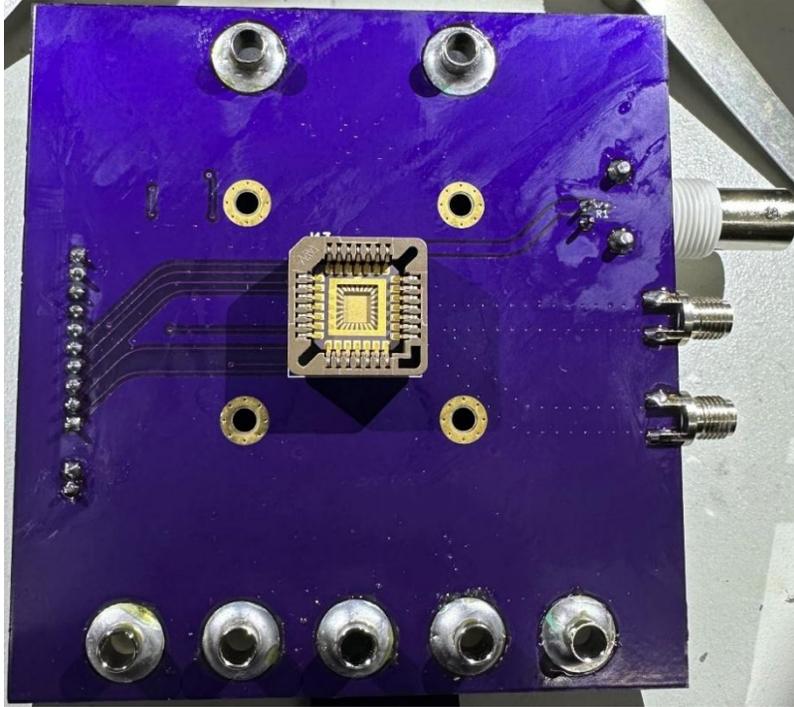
Assembled PCB rear view showing CQFJ-28 package and receptacle
